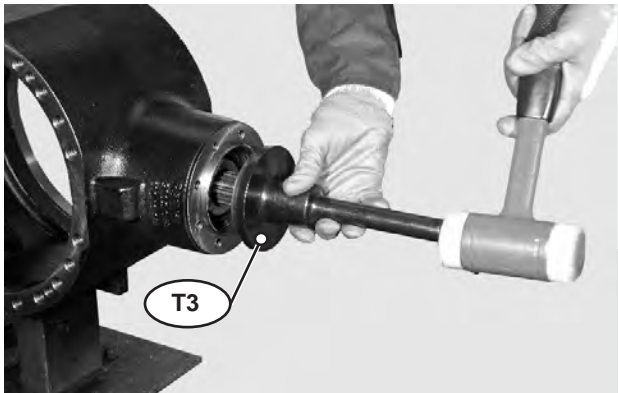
Apply Arexons rubber cement to the outer surface of the new seal ring (5) and fit ring in the main body using driver T3 (See drawing T3 p. 66).
